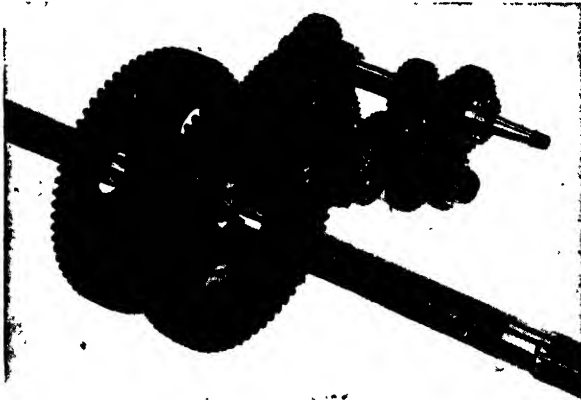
Where transmission shafts are close together, gears are used to transmit power from one shaft to another.
